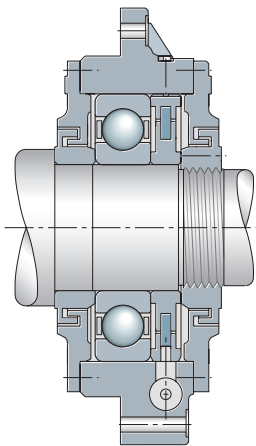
Special designs of FAG flanged housing units with angular contact or deep groove ball bearings
